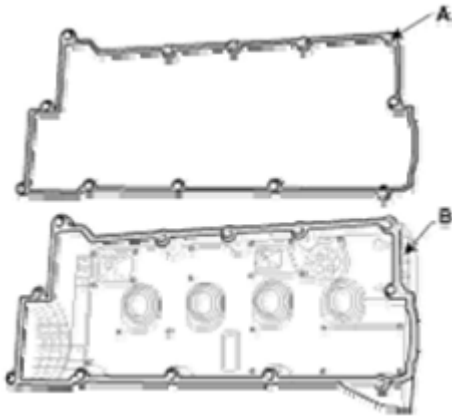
Installing Cylinder Head Cover Gasket In Groove Of Cylinder Head Cover
